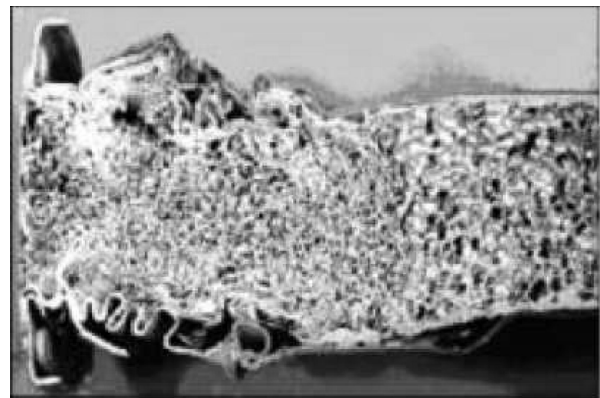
The motor carrier filled with aluminium foam after frontal impact [11]
